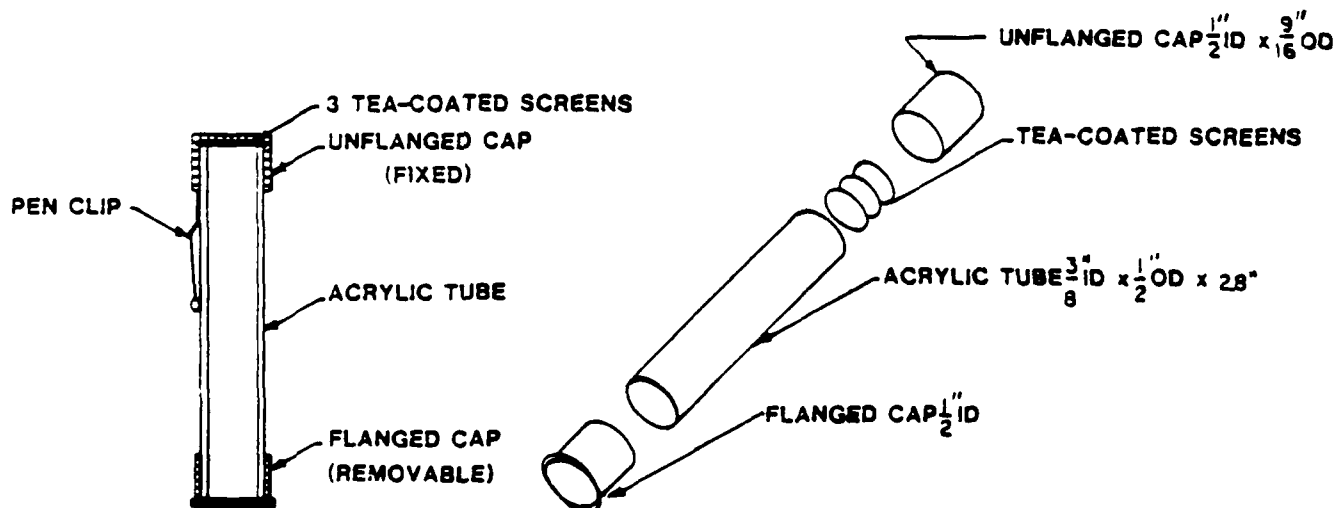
Assembled view (left) and exploded view (right) of sampler.
